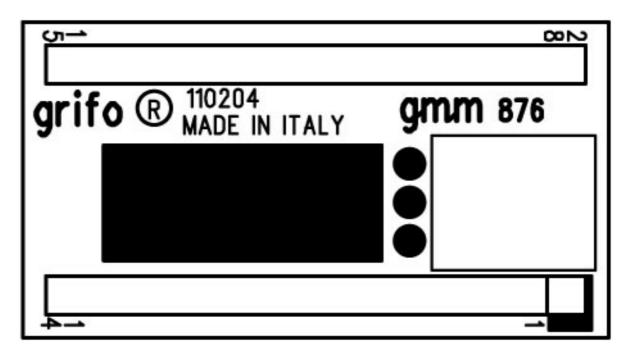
COMPONENTS MAP - SOLDER SIDE
